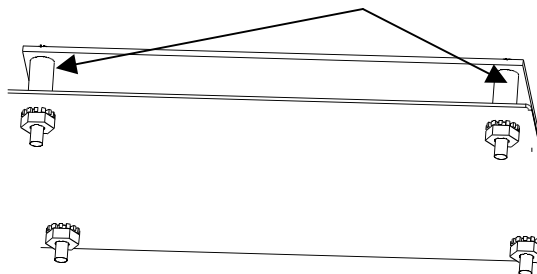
The motor interface board rests on spacers. Ensure the spacers are in place when the new board is mounted.
